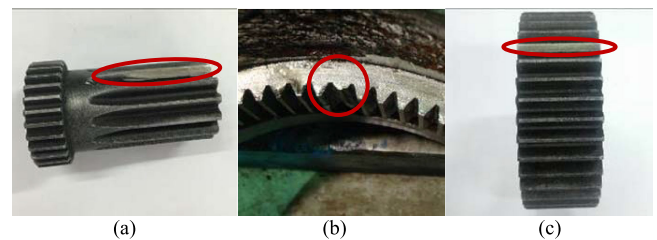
Localized gear faults: (a) Sun gear, (b) ring gear, and (c) planet gear.
